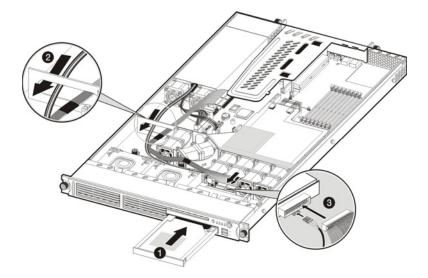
Installing the CD-ROM drive assembly in the chassis
